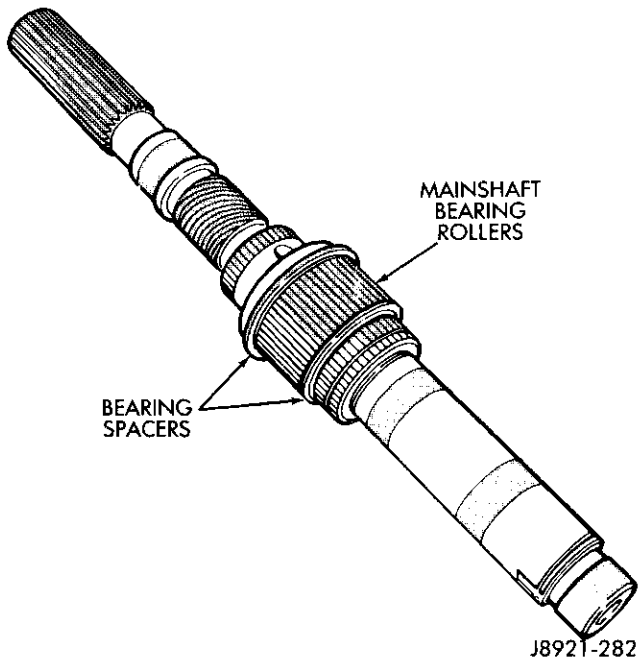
Installing Mainshaft Bearing Rollers and Spacers
